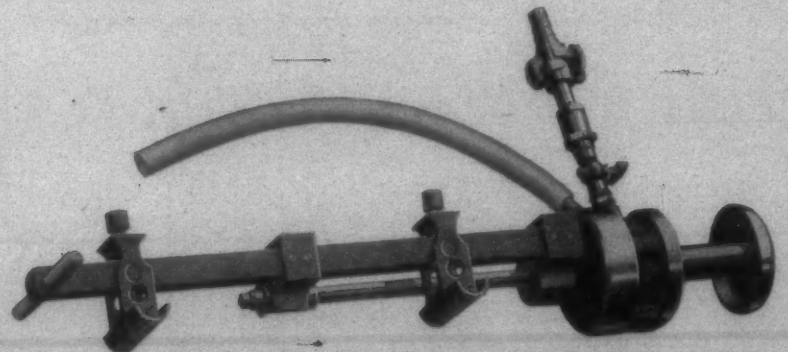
Small Portable Tool For Undercutting Mica, Driven by Air Motor
